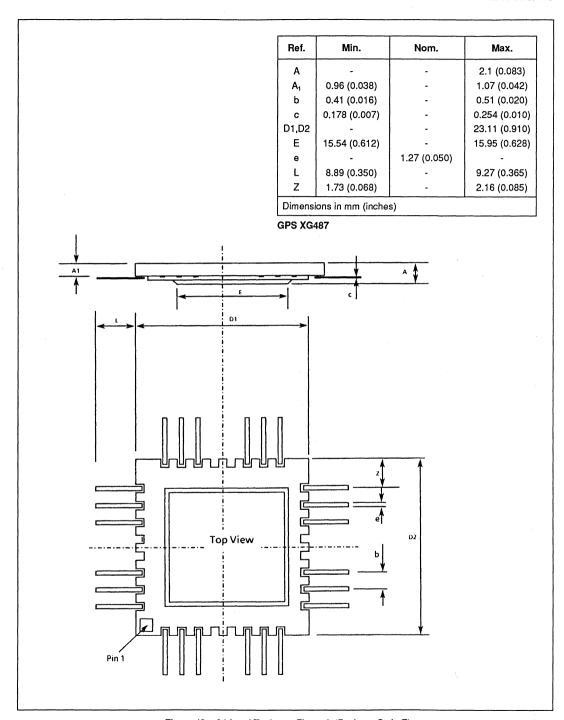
64-Lead Topbraze Flatpack (Package Style F)
